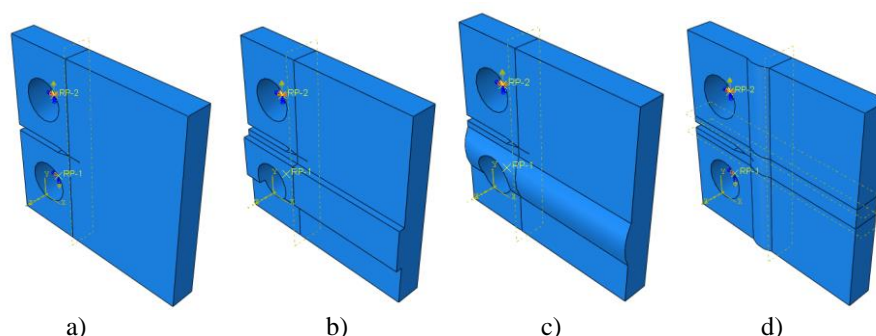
Different CT specimens used, a) normal 2D and 3D specimen, b) 2D specimen containing a longitudinal weld, c) 3D specimen containing a longitudinal weld, d) 3D specimen containing a transversal weld.
